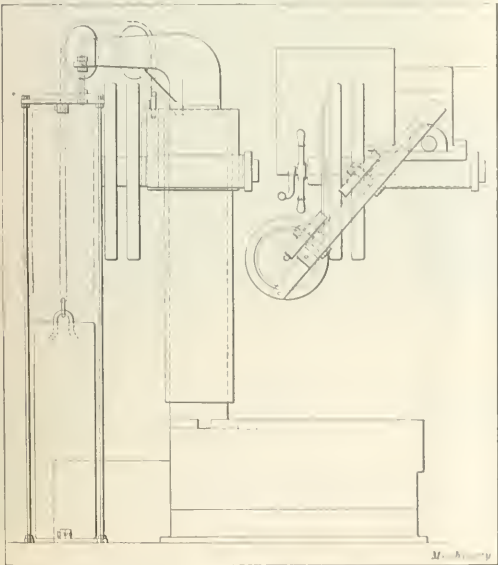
Arrangement of Counterweight for Work-spindle Head
